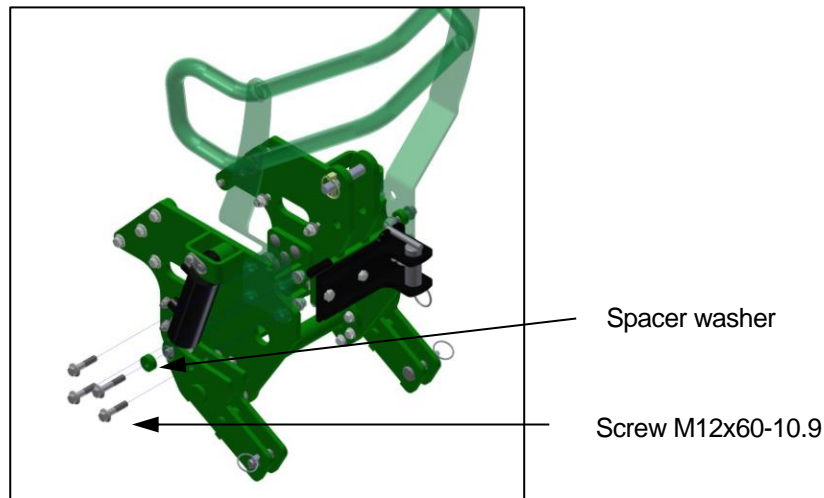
Mounting the front protective grille with extension kit cat. 1
